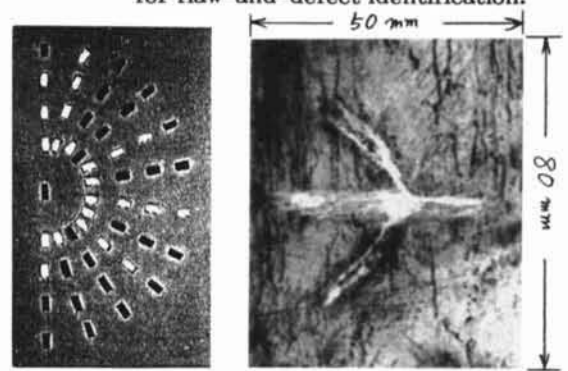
Example of diffraction light pattern for grazed flaws (left) and the identified flaws on the specimen surface (right).
